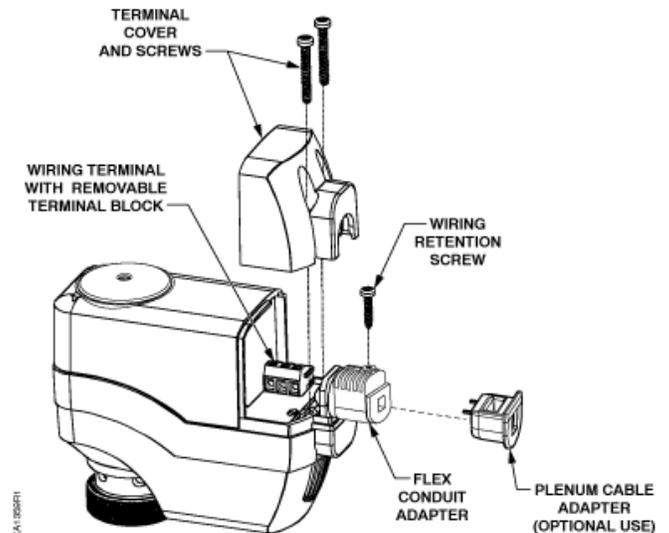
SSD61.5U/SSD81.5U Actuator Components.
